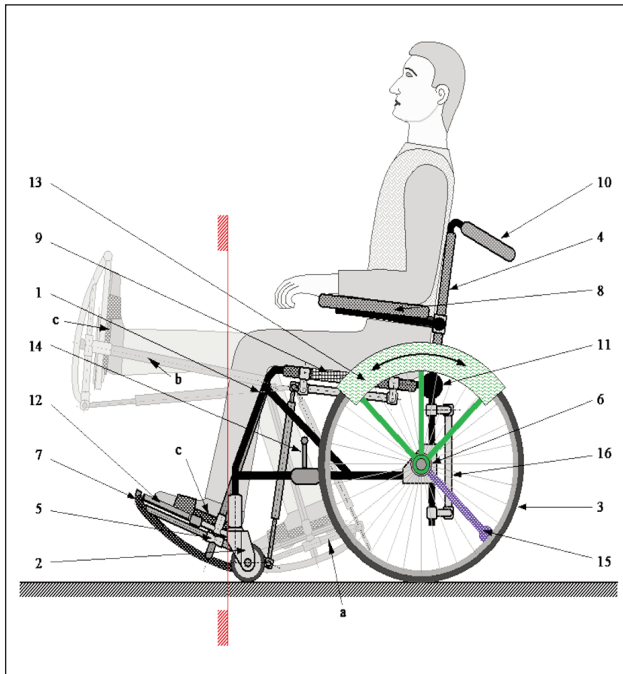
Component of the manually driven wheelchair: 1 – basic folding frame; 2 – swivel front wheel; 3 – rear wheel; 4 – seat with adjustable backrest; 5 – adjustable feet support; 6 – anti-overturning device; 7 – bumper climbing device; 8 – folding adjustable armrests; 9 – command block; 10 – assist/propelling handles from the attendant; 11 – backrest-angle tilting device; 12 – adjustable feet stabilization system; 13 – multifunctional: protective and propelling guard; 14 – mechanical brake with manual actuation enabling counteract gravitational backward movement; 15 – auxiliary/optional anti-overturning facility; 16 – folding/de-folding mechanism of the wheelchair; a – the fully retracted position of the adjustable feet support; b – constructive facility that enables for intermittently posturing the user's feet in cvasi horizontal position – prone to an improved anti-gravitational circulation, of venous-lymphatic drainage in the lower limbs; c – velcro standard support for the heel region
